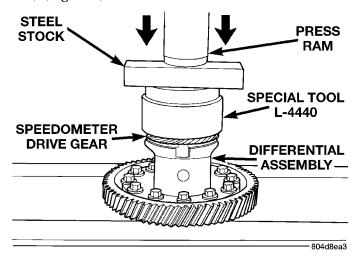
Press Gear onto Diferential DIFFERENTIAL GEARS
